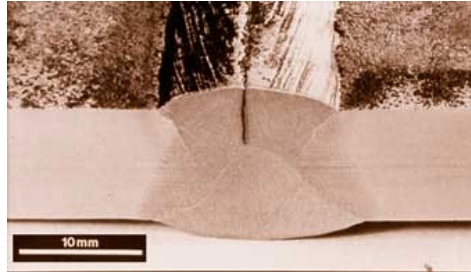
Solidification crack along the centre line of the weld (www.twi.co.uk)
